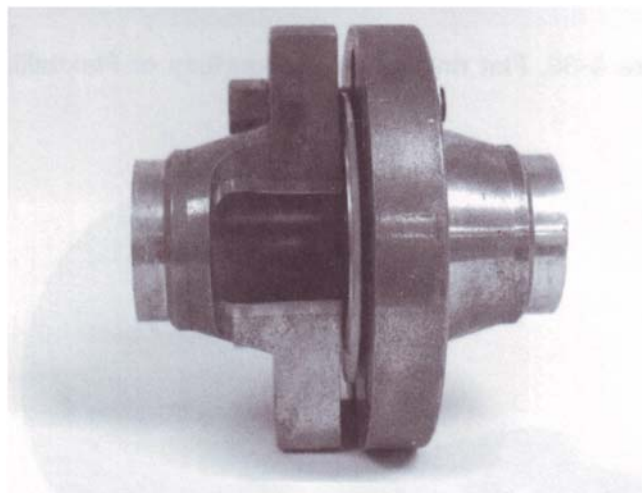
Flat ring gasket between flanges. Courtesy of Flexitallic, Inc.
